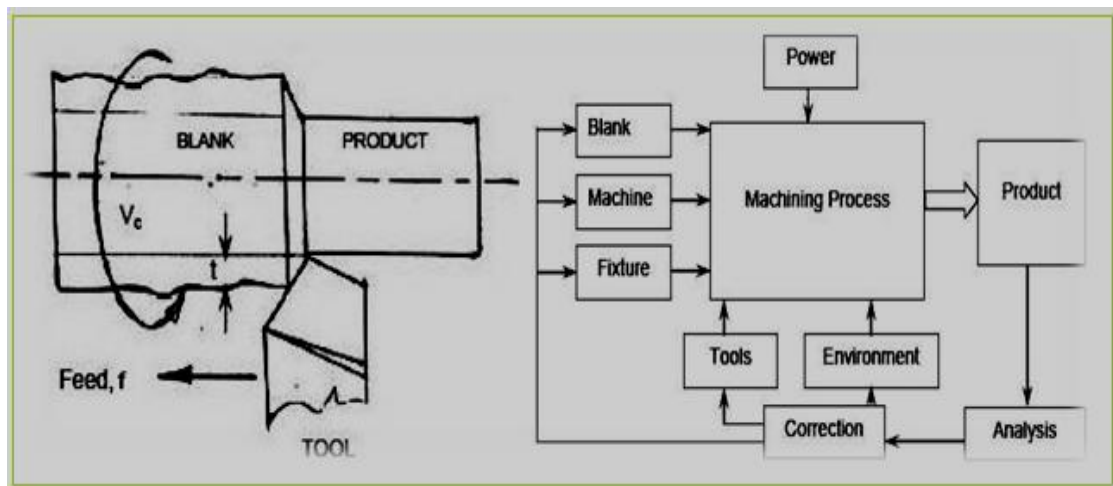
Principle of machining (Turning) and Requirements for machining
